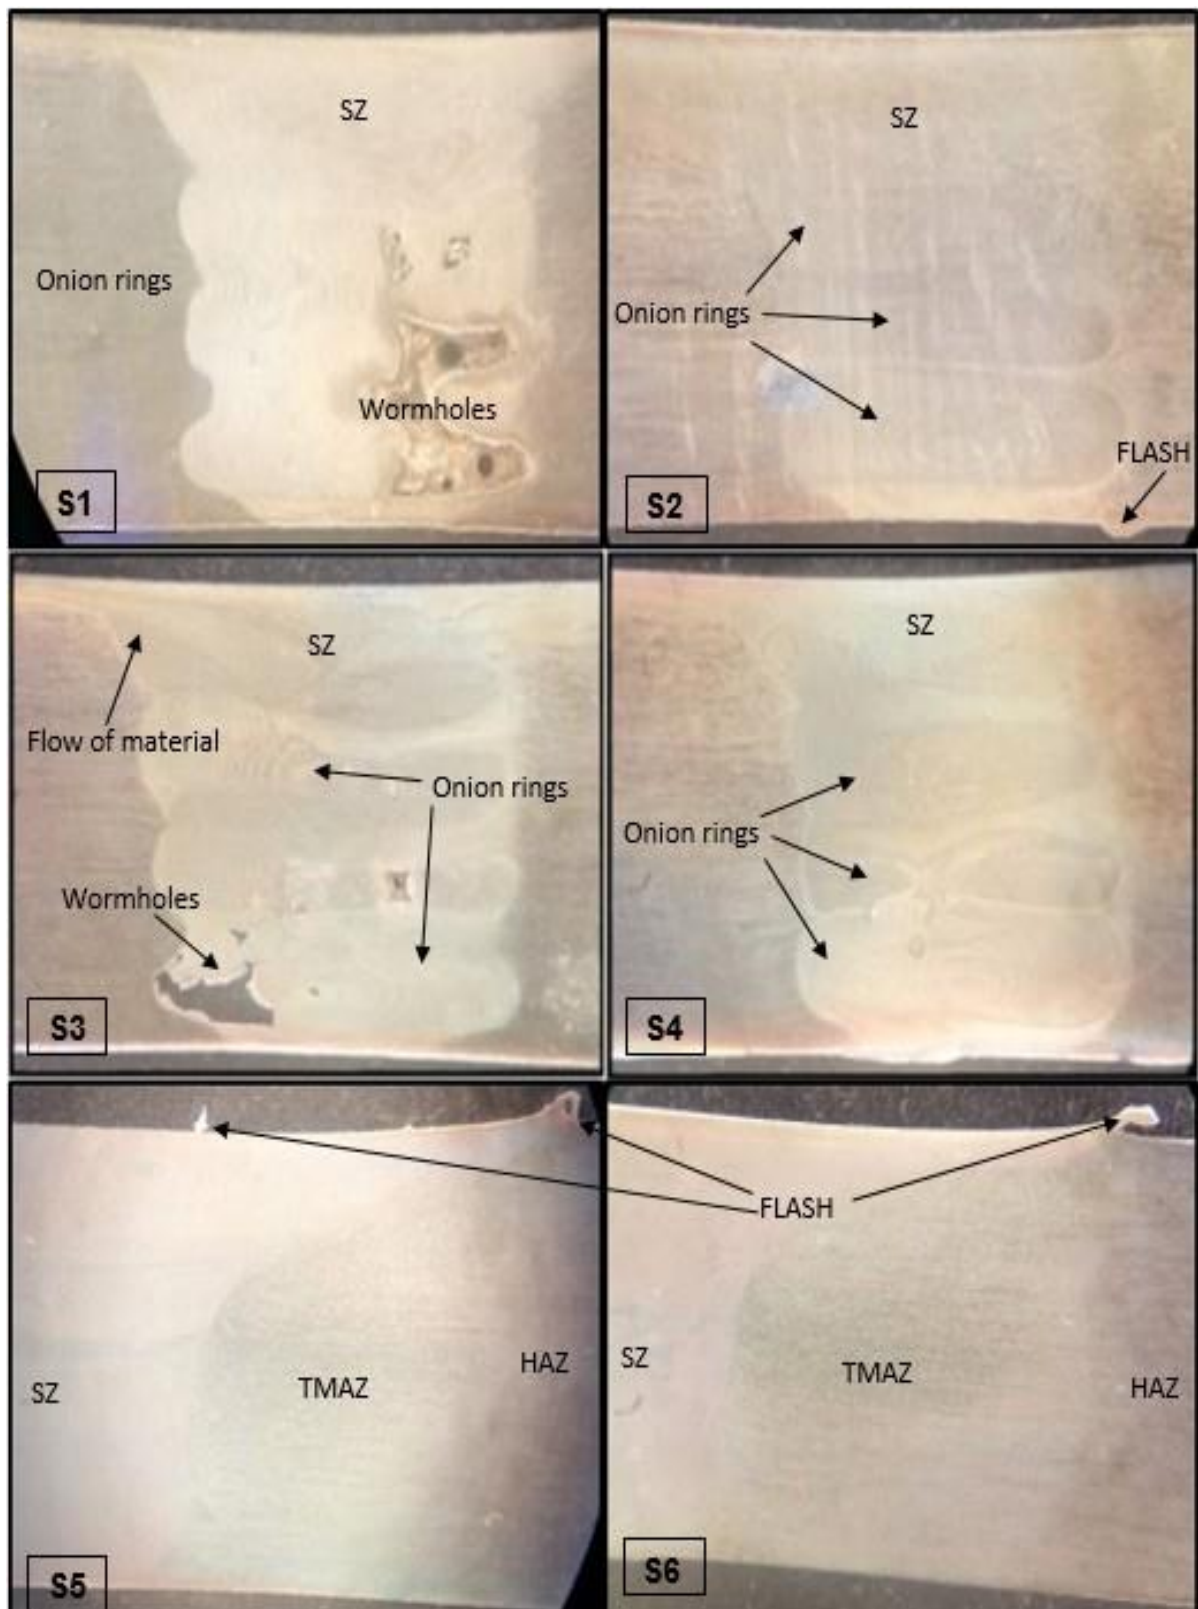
Shows the macrostructure of FSW specimens taken from the start of the weld, welded at six different rotational speeds
